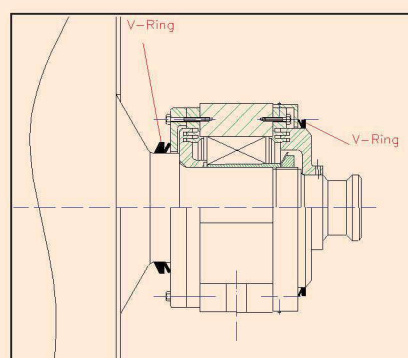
Detail of two V-ring seals installed on flinger to minimize the contaminations spray on the labyrinth seal.
